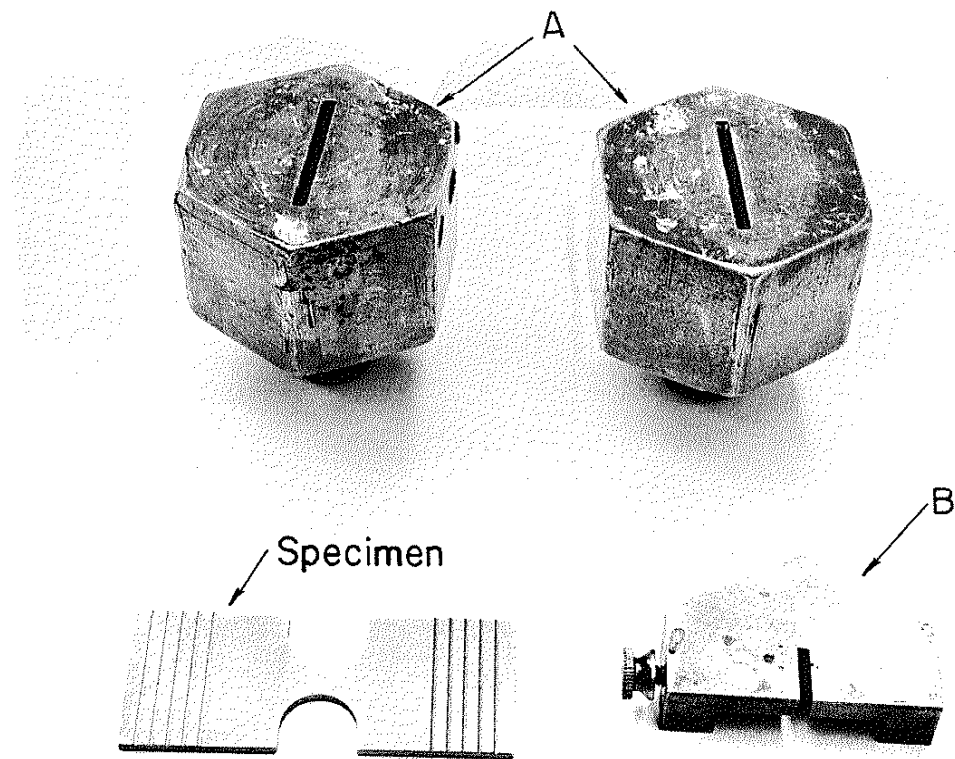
Mounting Fixtures-Sheet Steel Specimens
